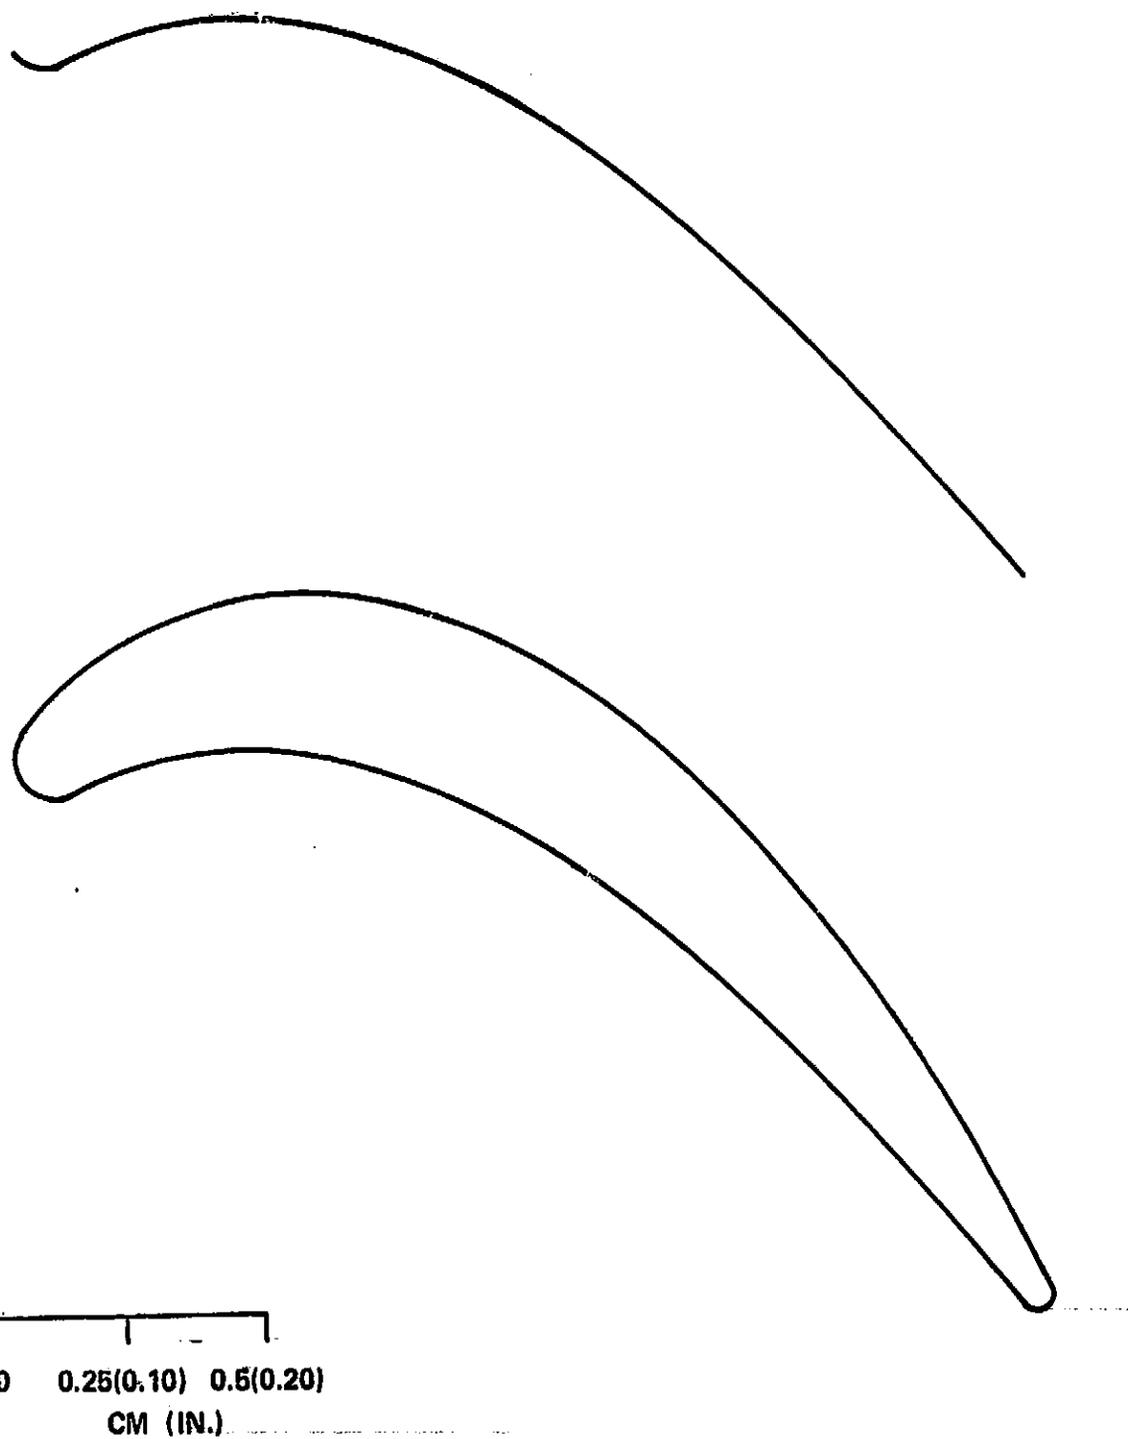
Rotor Mean Section [R = 12.37 cm (4.872 in.)]
